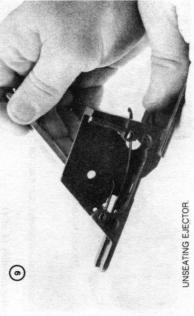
Disassembly / assembly of trigger housing assembly (3 of 4).
